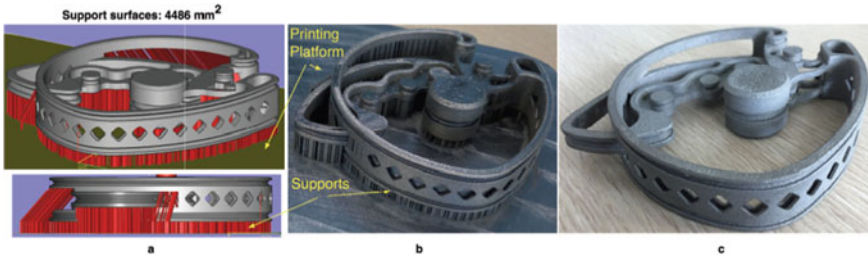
a A summary of the supports required to ensure the object may be printed (in red); b the printed cam; and c the new cam following support removal and sandblasting [55]
